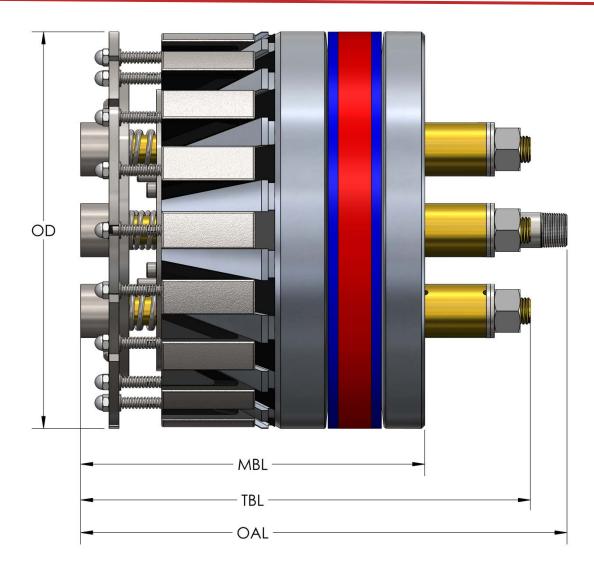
GripSafe ST Inboard Insertion Blocking Dimensions
